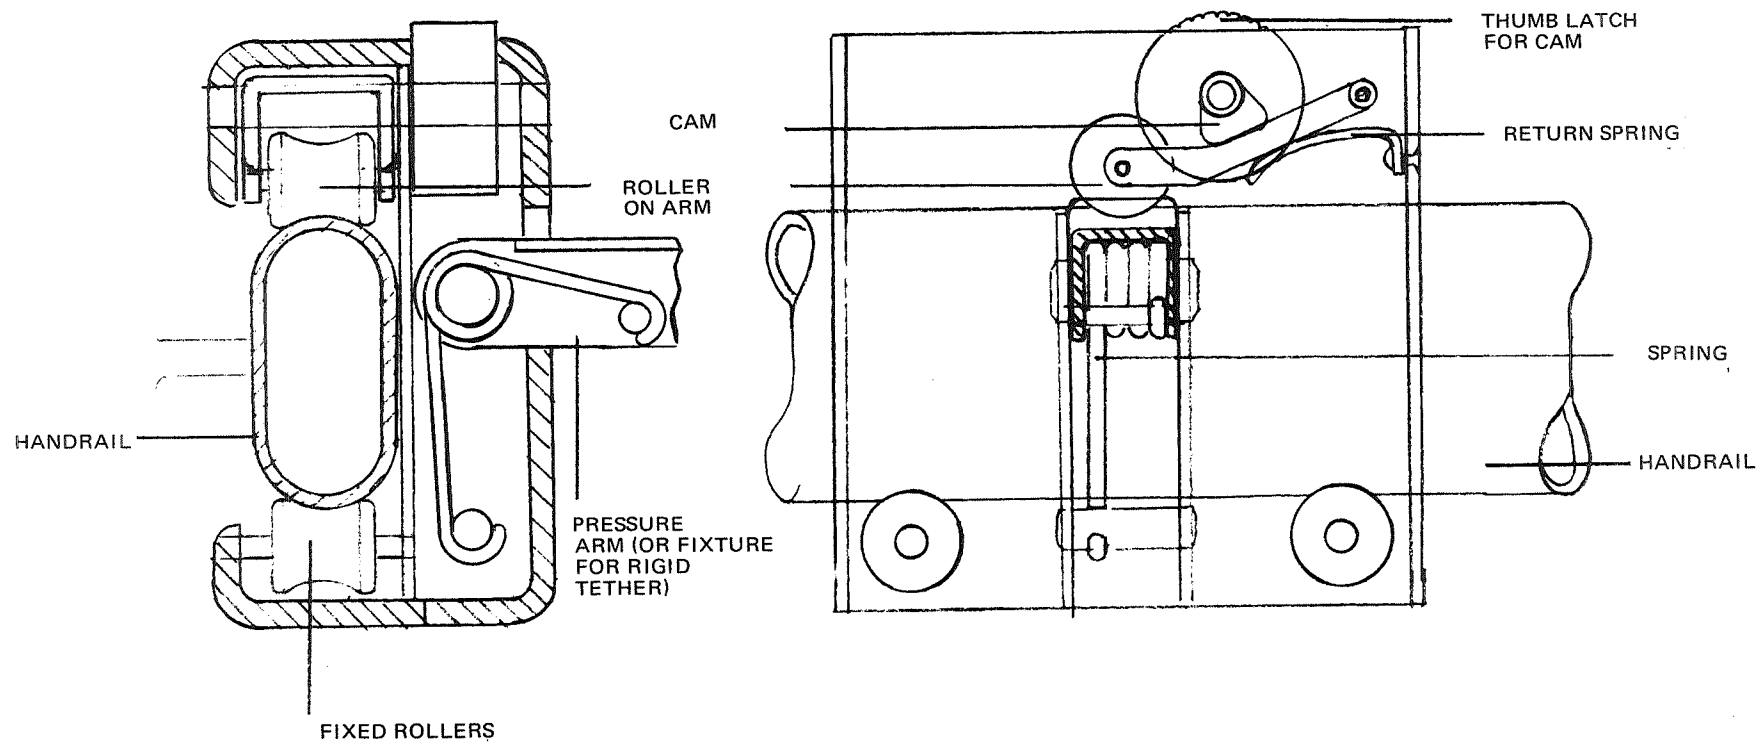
SLIDE ASSEMBLY - RIGID TETHER
